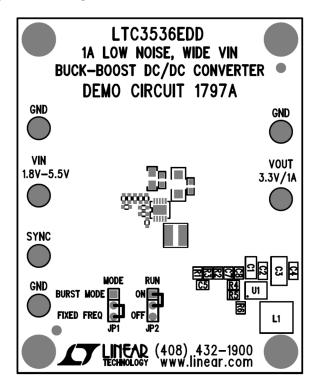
Fabrication Layer of Example PCB with 4 Layers
